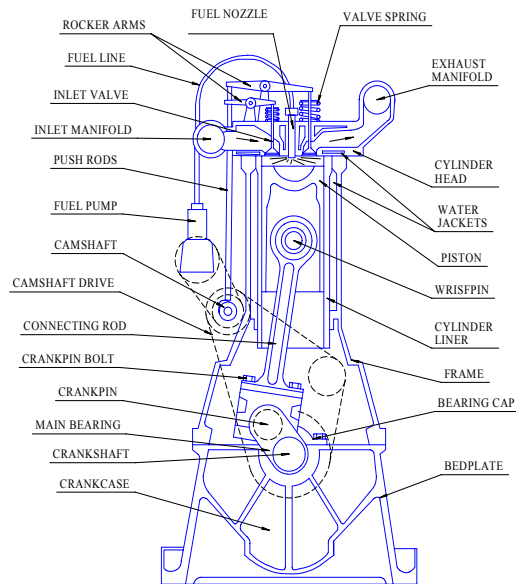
Parts of a Four-Cycle Diesel Engine.
